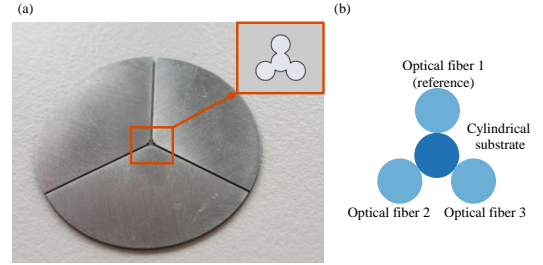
(a) Three-piece laser cut holder used for aligning the optical fibers on the Nitinol wire. (b) Cross-section of the sensor.
